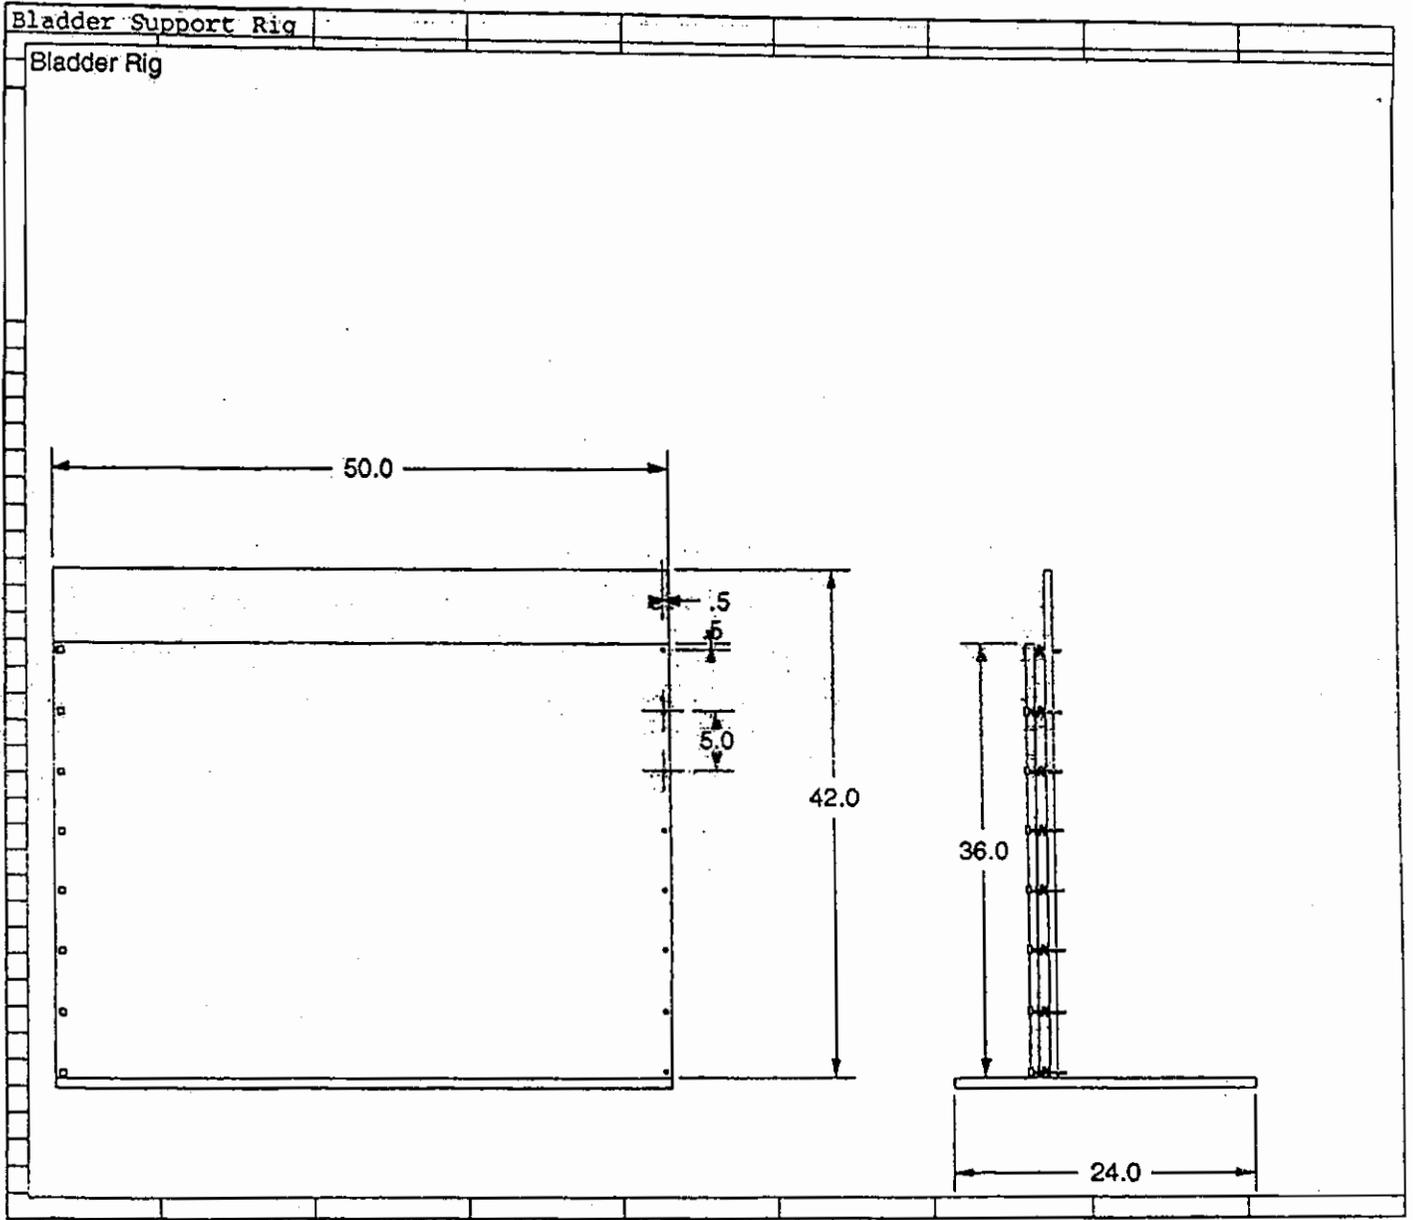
Assembly of Teflon bladder on support structure. All dimensions in inches.
